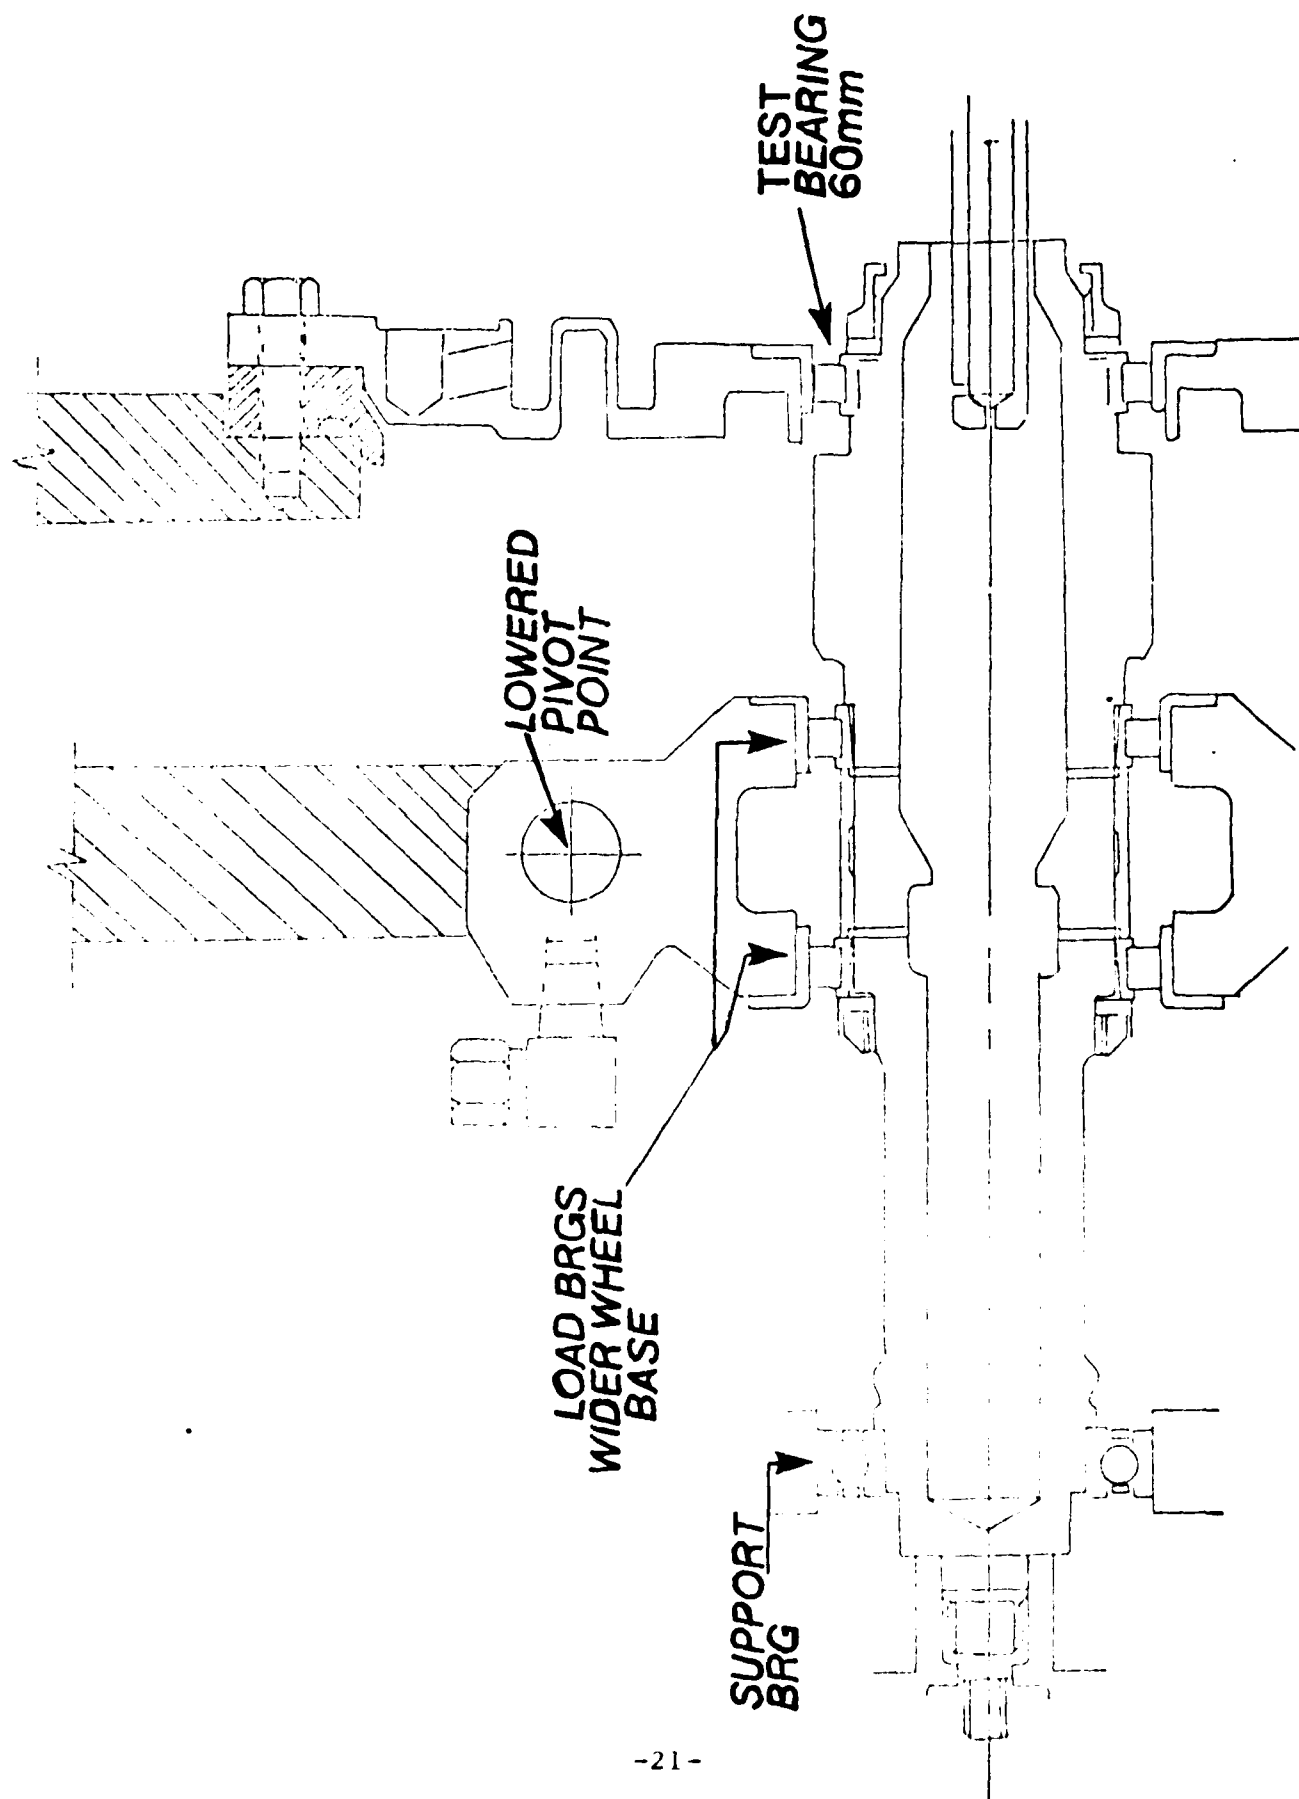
TEST SECTION SHAFT MODIFICATION (TO PROVIDE UNDER RACE LUBRICATION TO LOAD BEARING)
